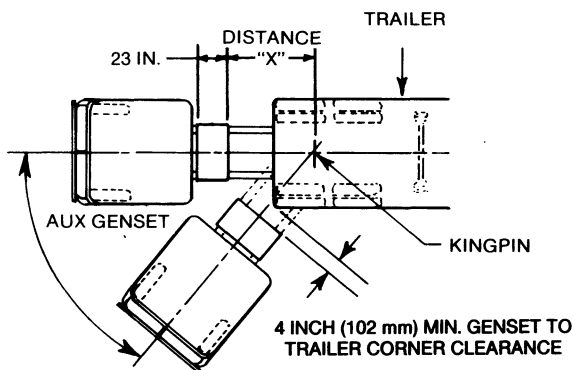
CRITICAL DIMENSIONS, TOP VIEW
